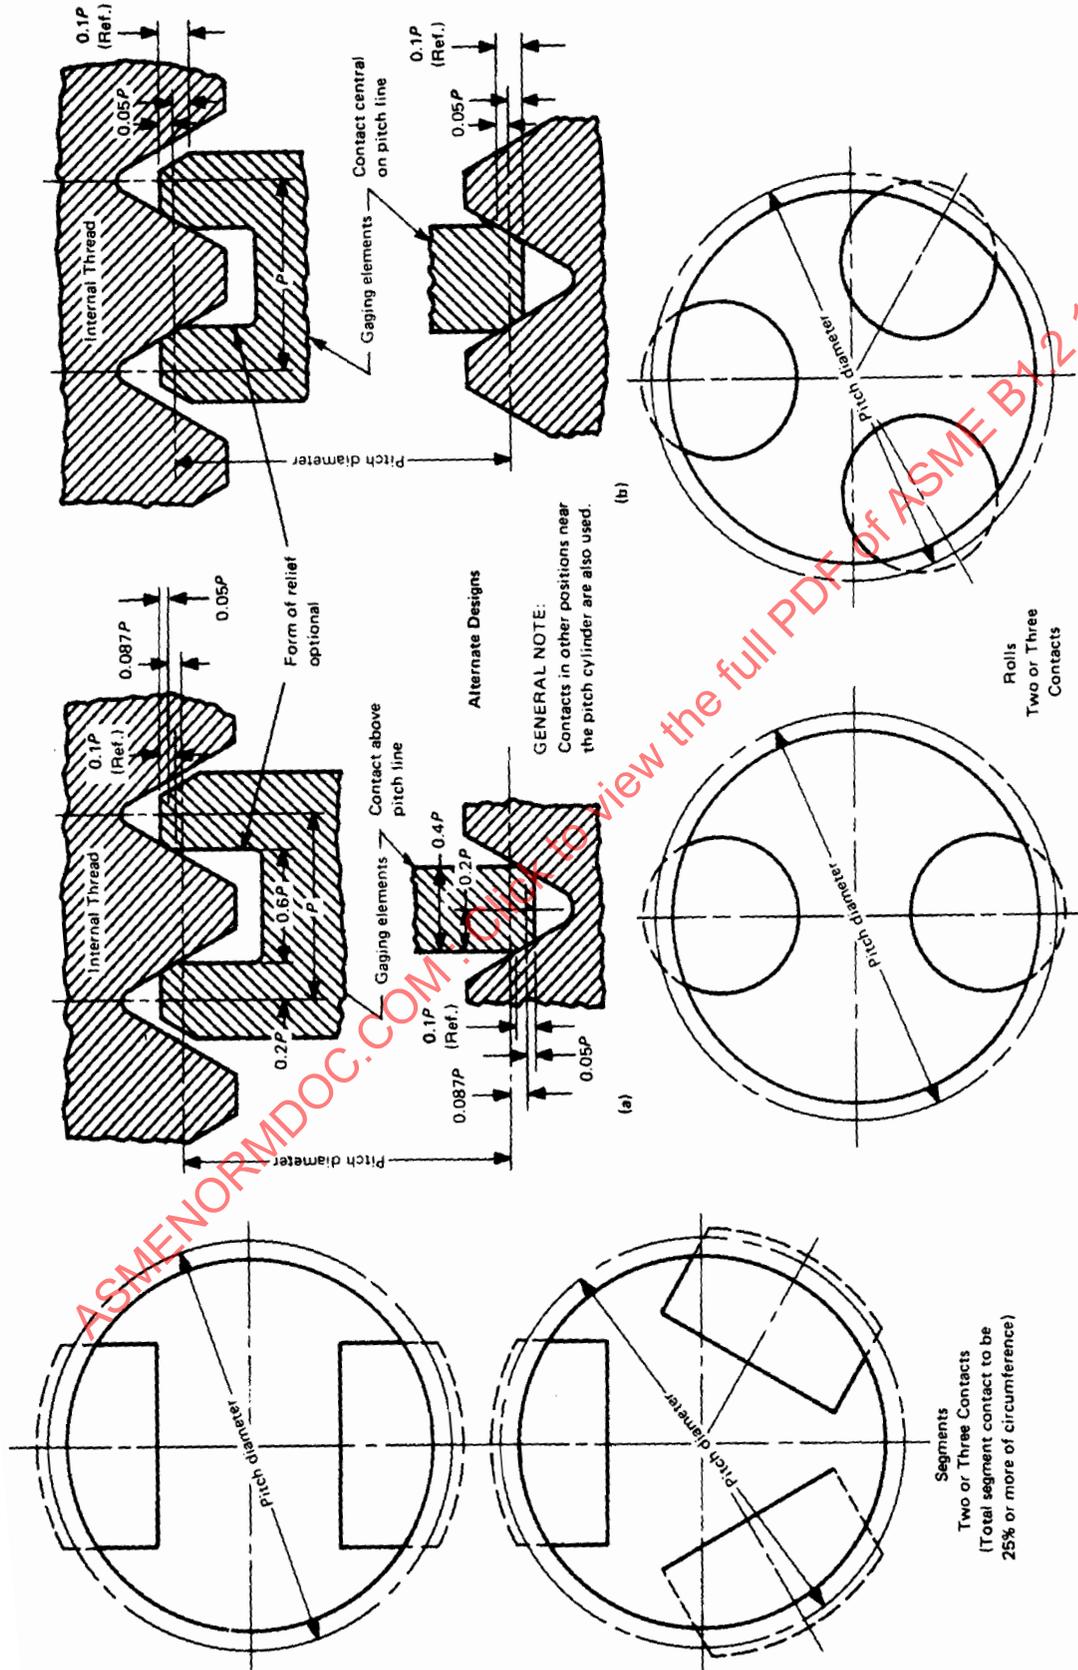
INDICATING THREAD GAGES — MINIMUM-MATERIAL PITCH DIAMETER
